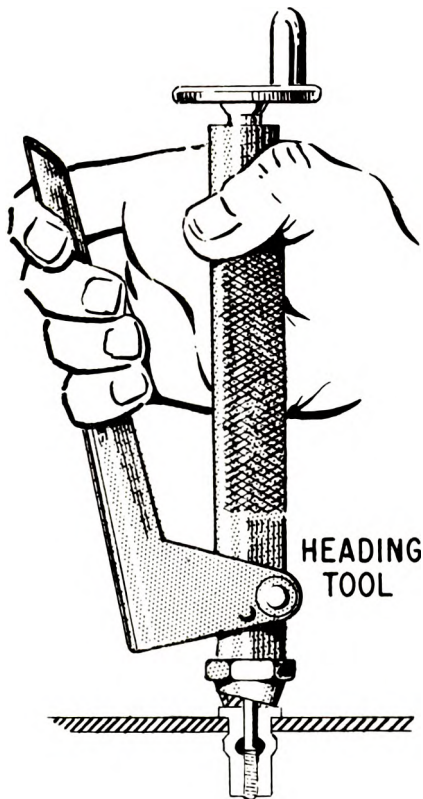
Hand-operated Rivnut heading and keyway cutter tools.
